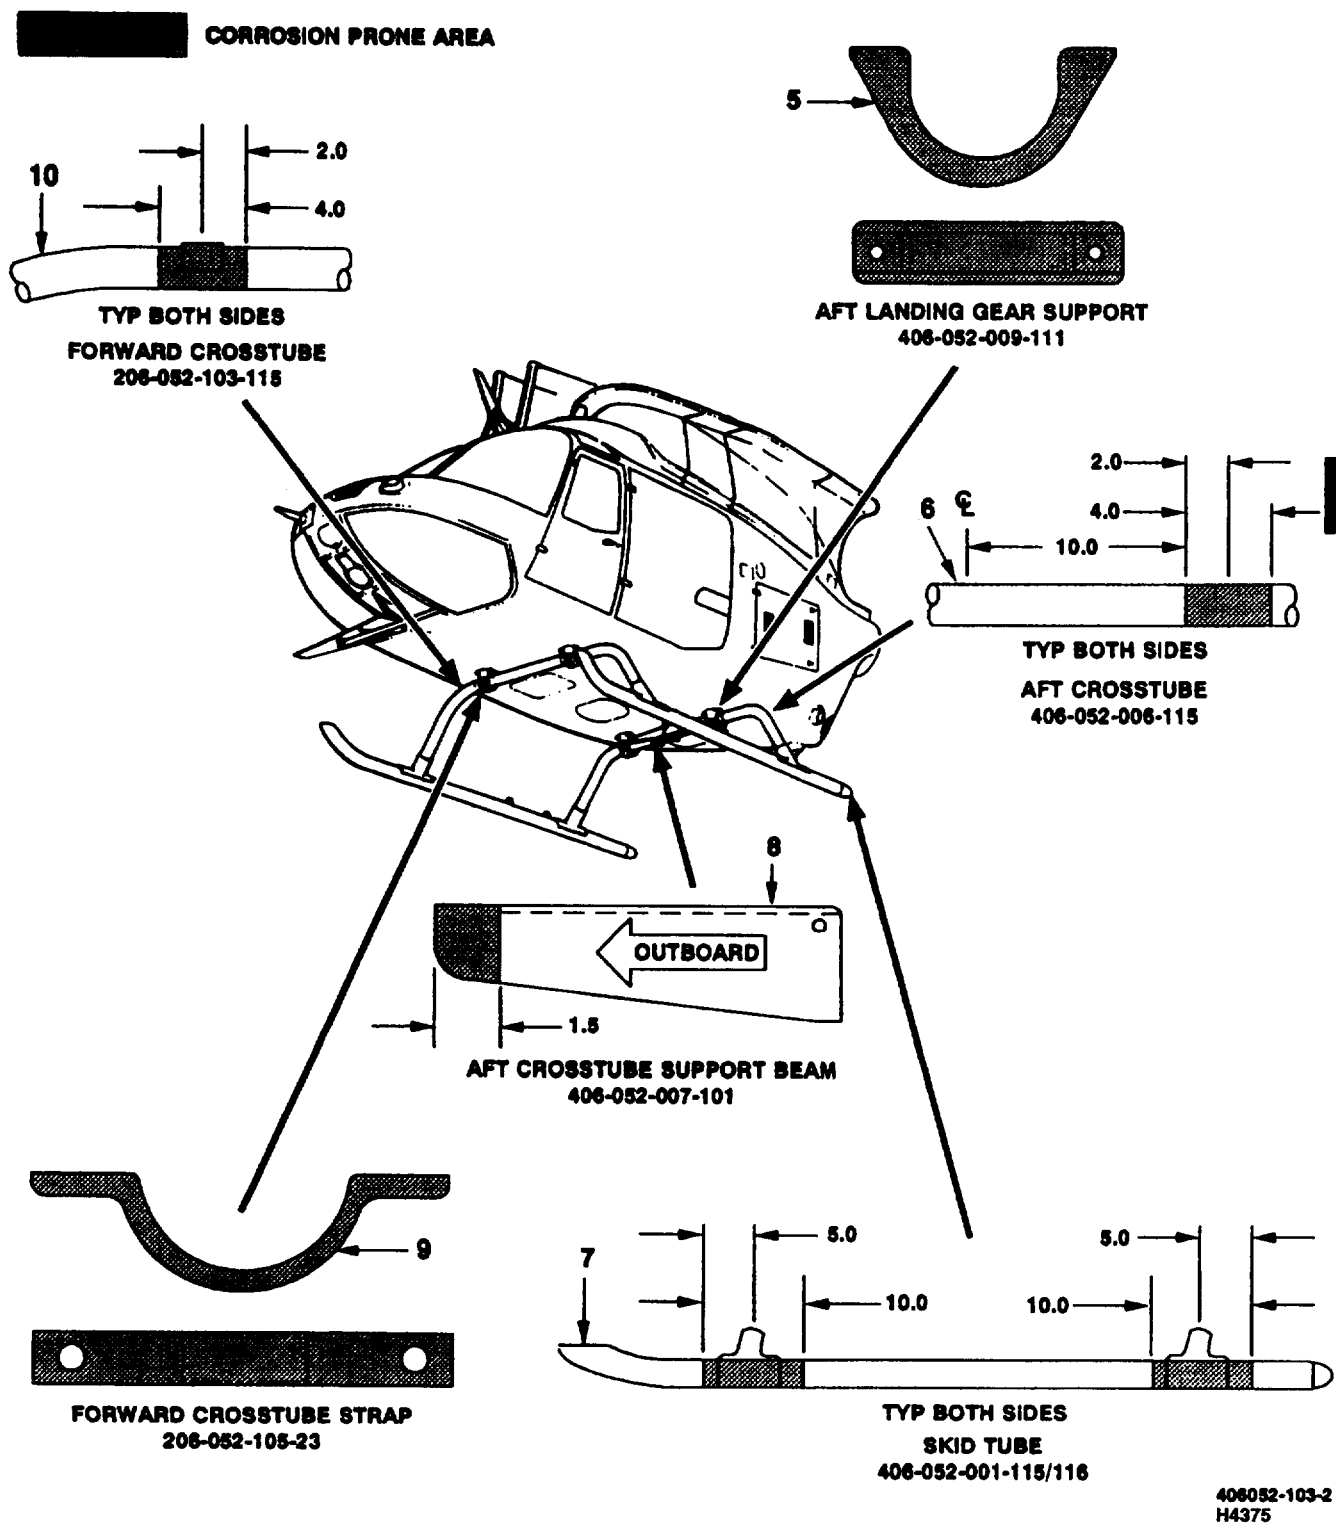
Landing Gear Corrosion Prone Areas (Sheet 2)
